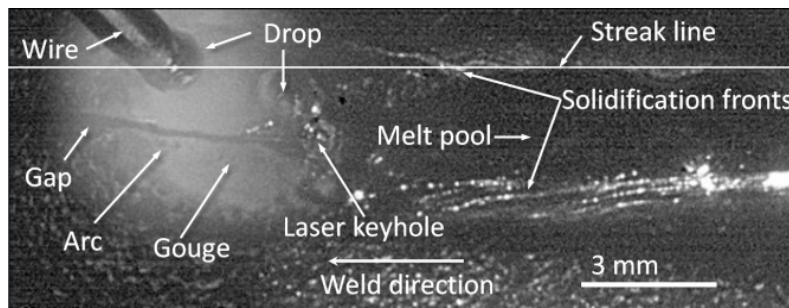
(e) High Speed Image of laser arc hybrid welding (melt, laser keyhole, drops, arc, joint)
